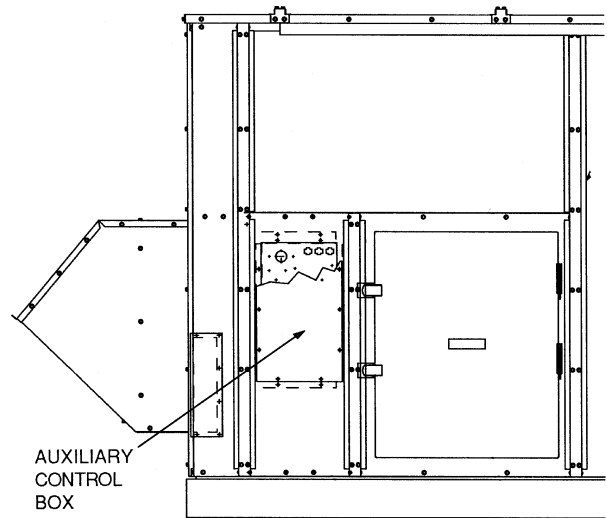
Auxiliary Control Box Location; Size 030-050 Units
